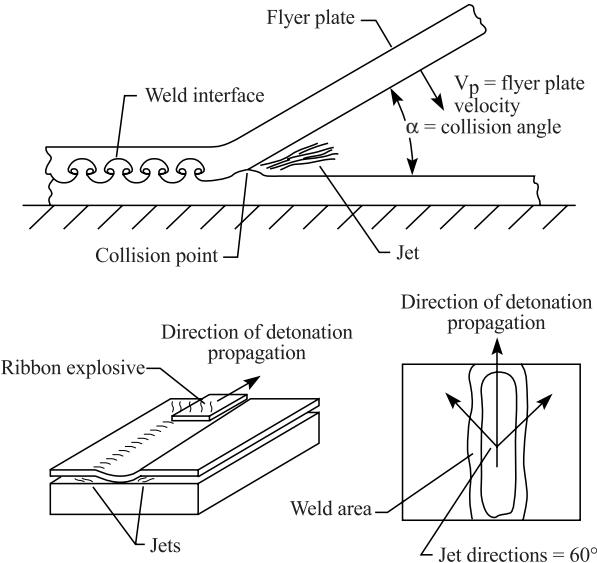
High-velocity, angular impacts of the two explosive joining processes: cladding in the top sketch and the NASA explosive seam welding in the bottom sketch.
